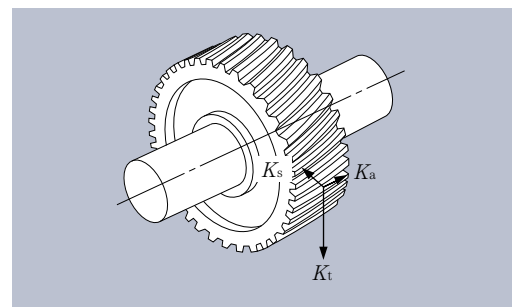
to 3.3 illustrate the loads acting on spur gear and helical gear which are used with a parallel shaft. The magnitude of each load can be determined using the formulas (3.2) (3.5).
